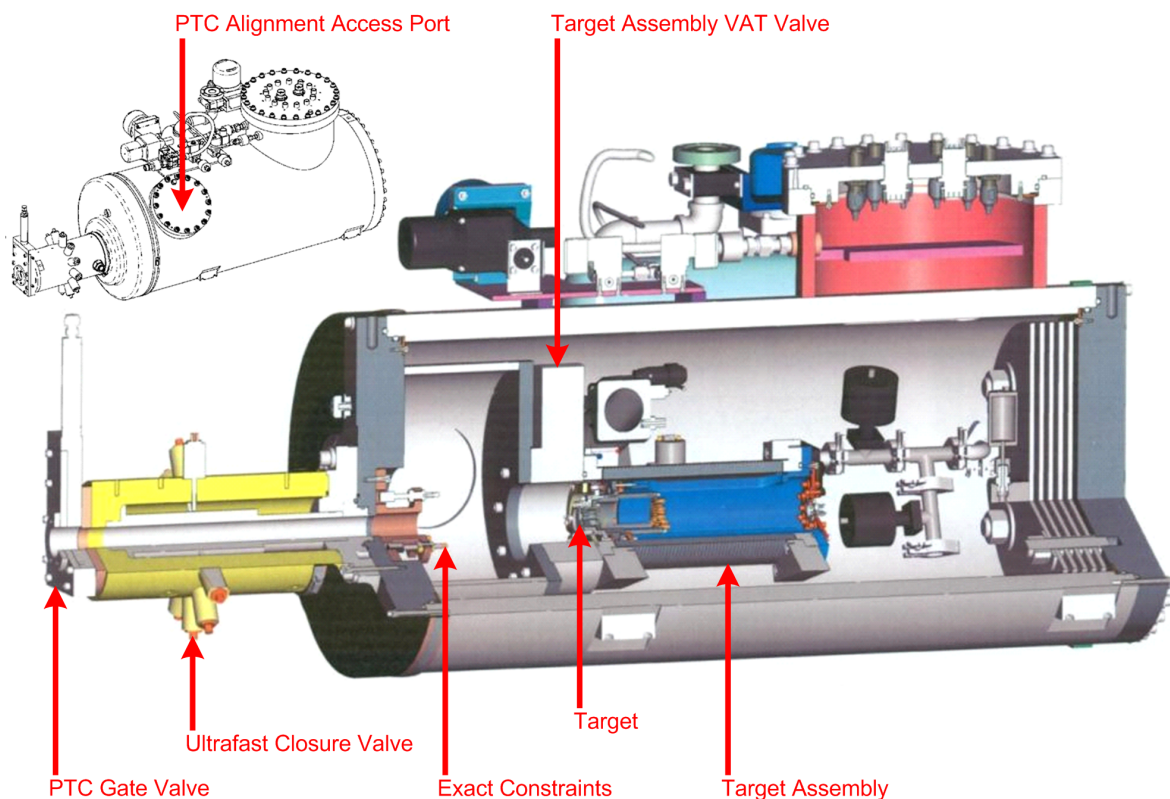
Primary Target Chamber (PTC) Assembly with and without Cutaway
